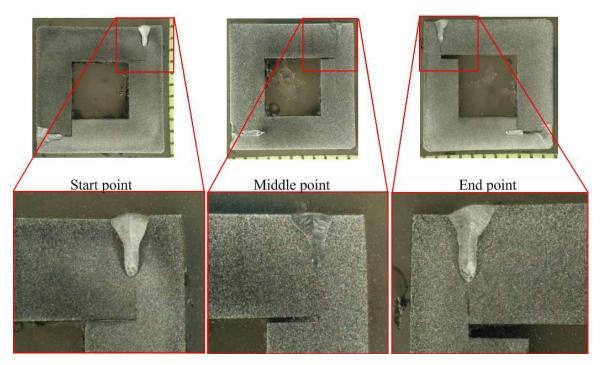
Macro images of the cross-sections of the welded distillation test chamber.
